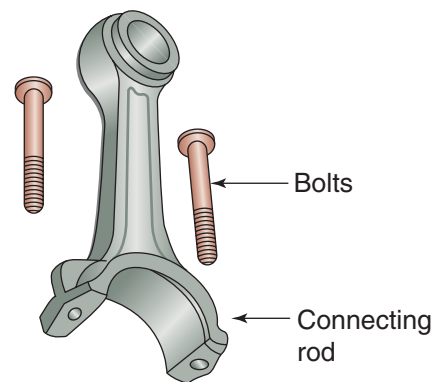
The typical connecting rod on a power equipment engine is a multi-piece design, as illustrated here. The rod may or may not have nuts on the end (instead it may have threads).
